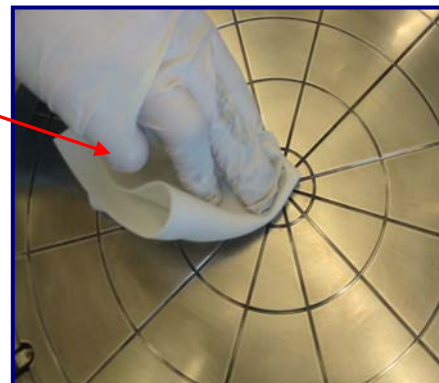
& 74: [HT4790](#) UltraSOLV® Foam Wiper cleaning surface of heater assembly
